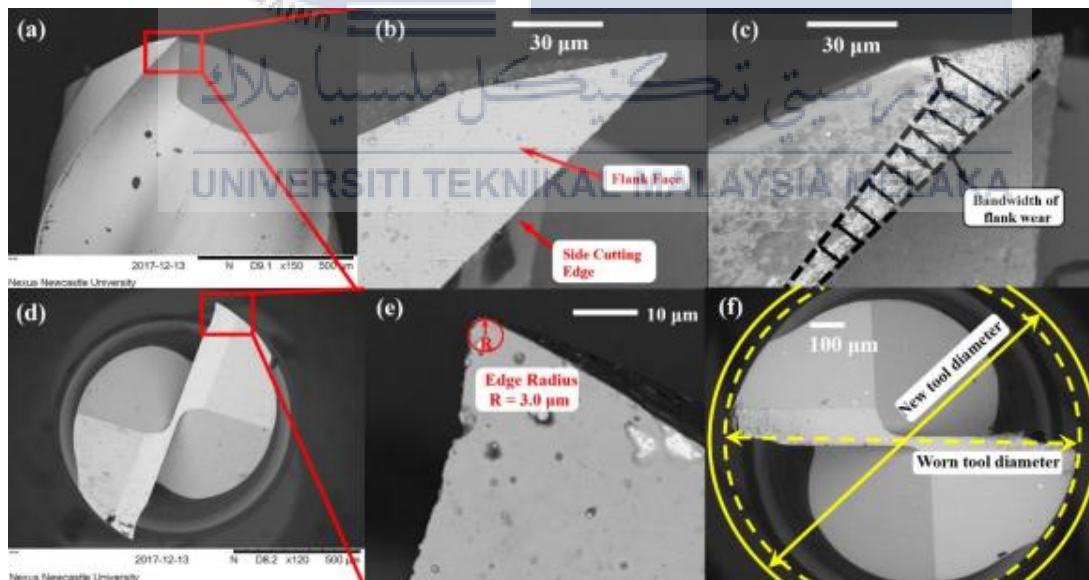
a) A side view of a brand new tool; (b) the flank face of the brand new tool; (c) the measurement method of the tool flank wear; (d) a top view of brand new tool; (e) the measurement method of the tool edge radius; (f) the measurement method of the worn tool diameter loss. (Lu Zheng 2020).
